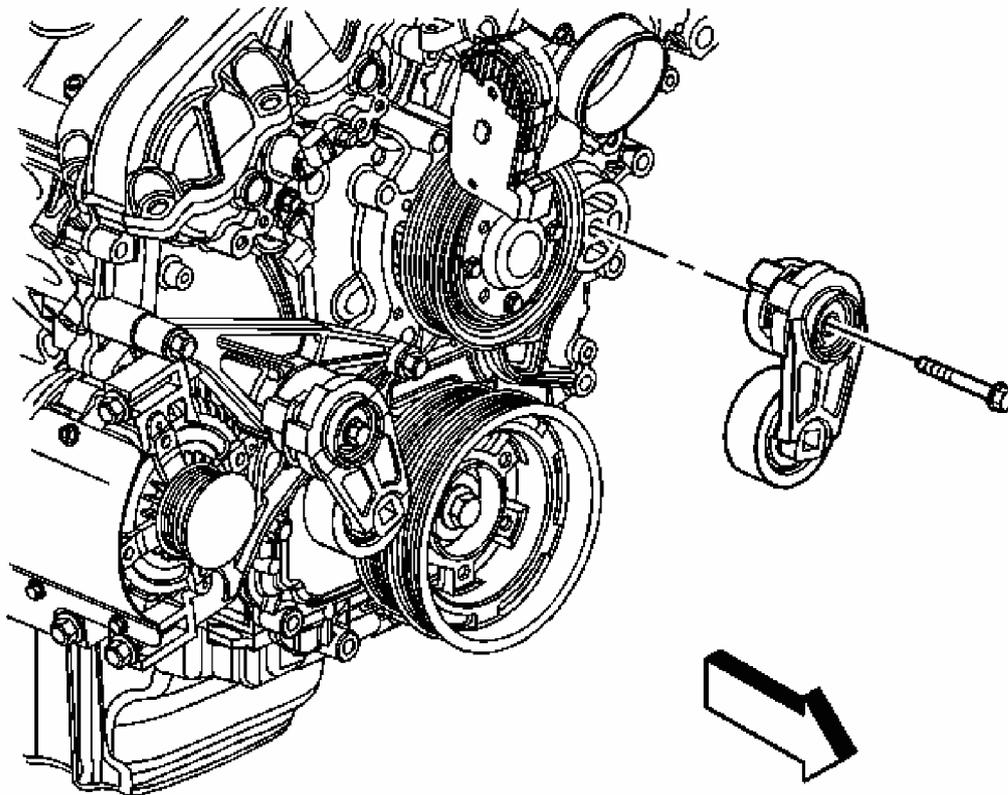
View Of Power Steering & A/C Drive Belt Tensioner
